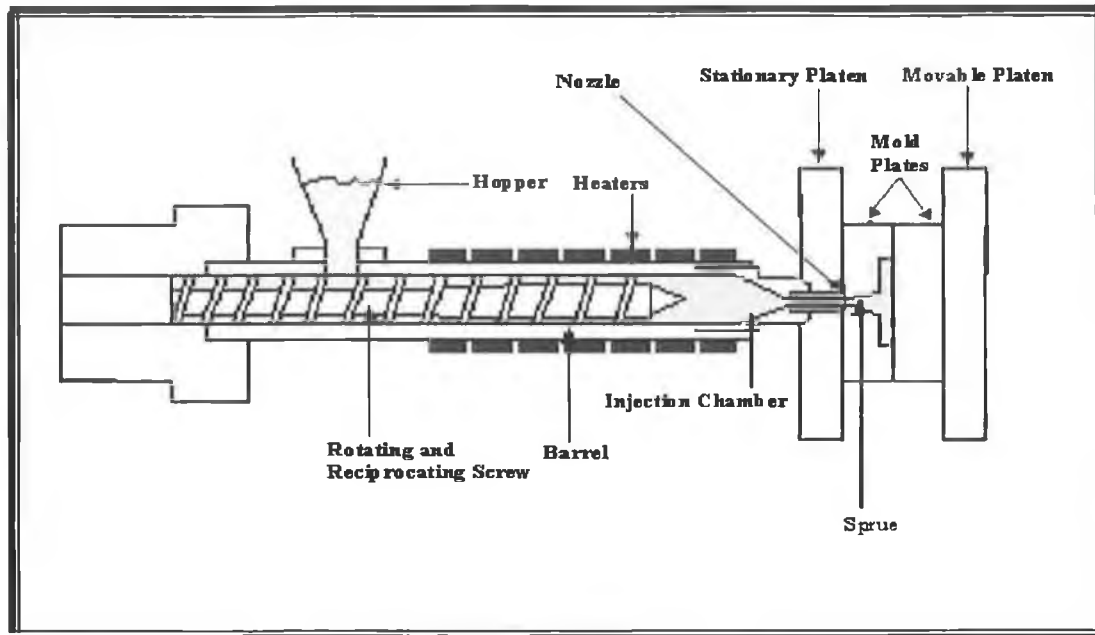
A single screw injection-moulding machine for thermoplastics, showing the plasticizing screw, a barrel, and band heaters to heat the barrel, a stationary platen, and a movable platen [45].
